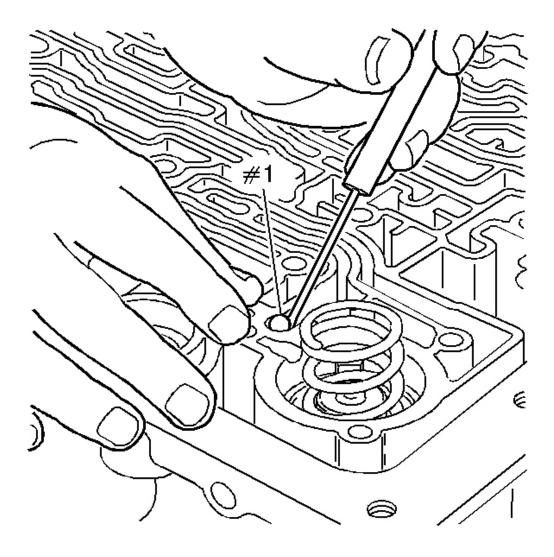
Locating #1 Checkball Courtesy of GENERAL MOTORS CORP.
